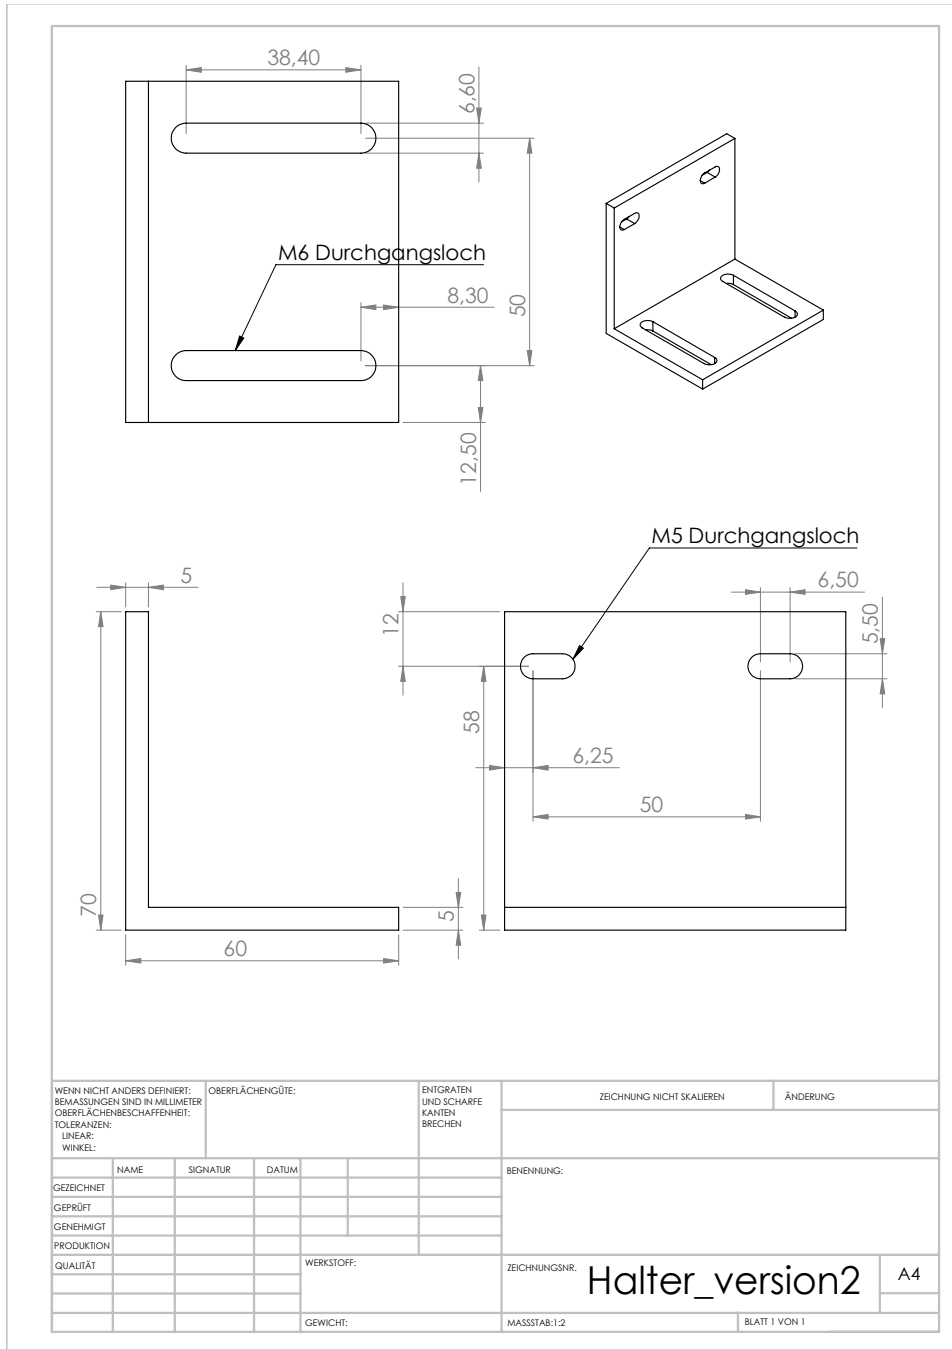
Technical drawing for the sensor holder for the positioning close to the atoms. It's made out of aluminium and was machined by the institute workshop.
